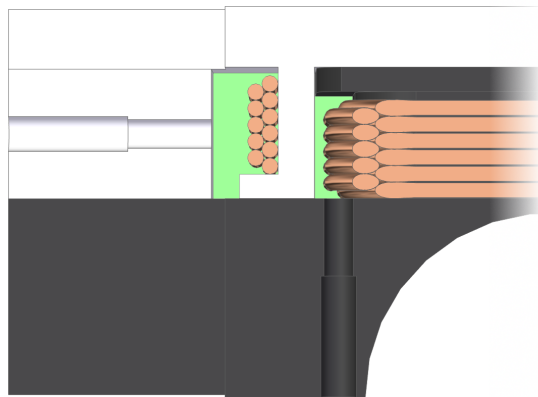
Coils are cemented inside the Delrin holder via epoxy injected through small holes shown via a section view.
